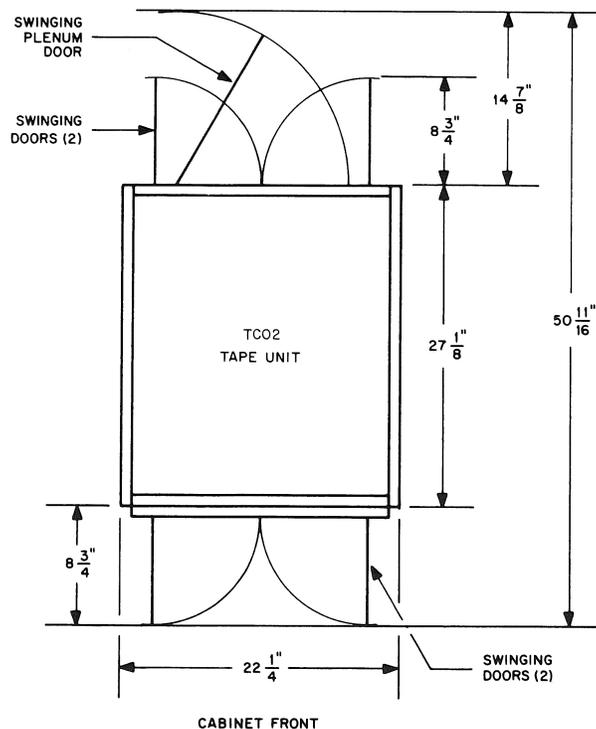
TC02 Unit Single Cabinet Installation Dimensions
